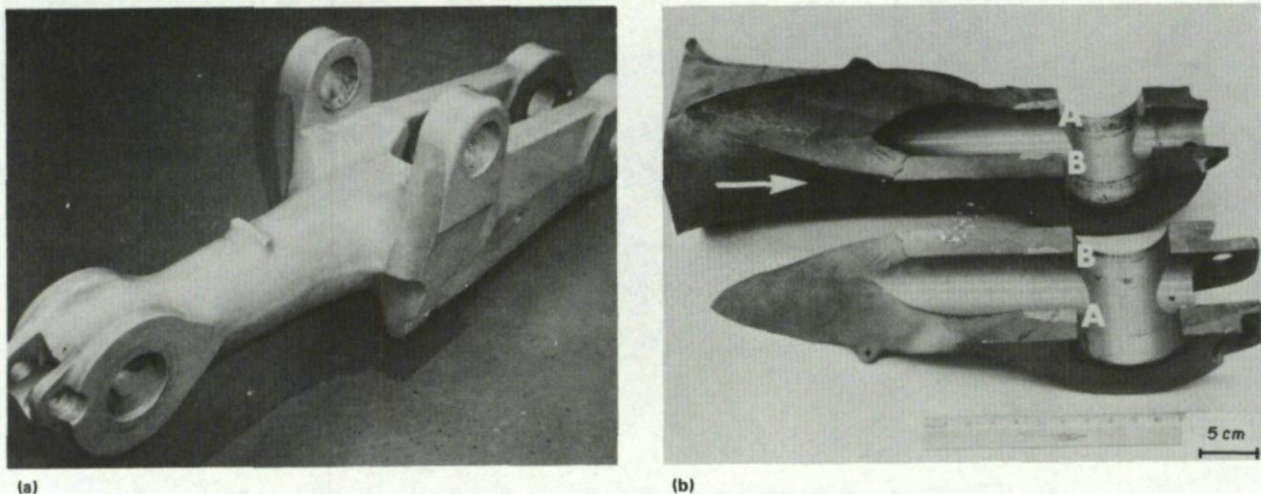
Stress corrosion cracking in a 7075-T6 main landing gear bogie, case history 13-4.
